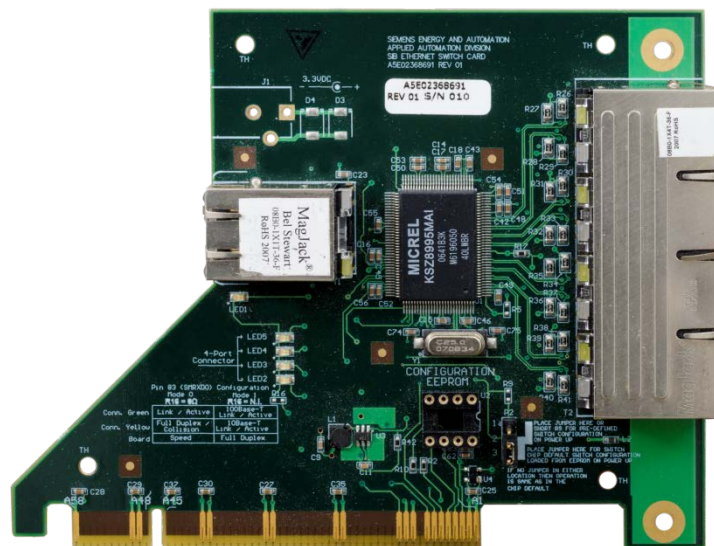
Ethernet Switch Board (ESB) Part Number A5E02368691001
